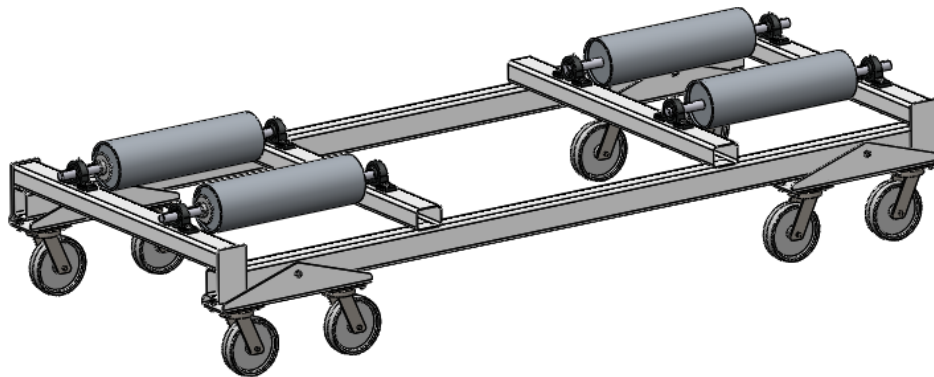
Bottom Frame with Bottom Rollers and Walking Axles [8].
